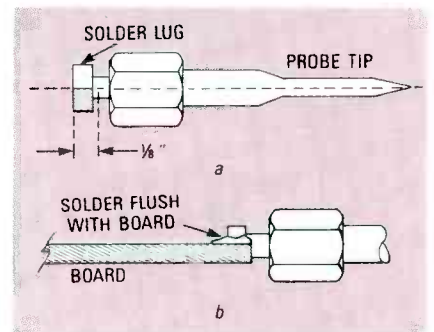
TO MOUNT THE LOGIC PROBE TIP onto the frequency probe PC board, file 1/8-inch of the bottom of the hex-nut-shaped solder lug flat down to the centerline of the logic probe tip. Then, solder it flush to the correct pad on the component side of the PC board.
